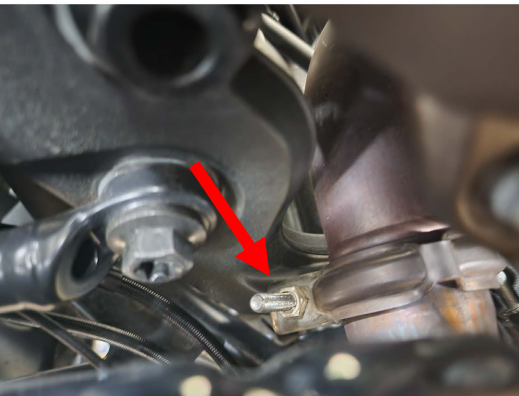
find the screw holding the joint clamps on the rear header pipe and loosen.
